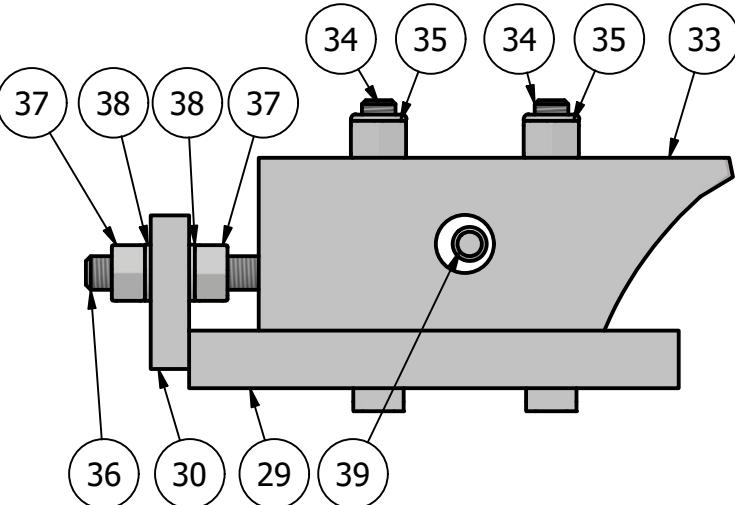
## DETAIL VIEW - ANVIL RACK ASSEMBLY
